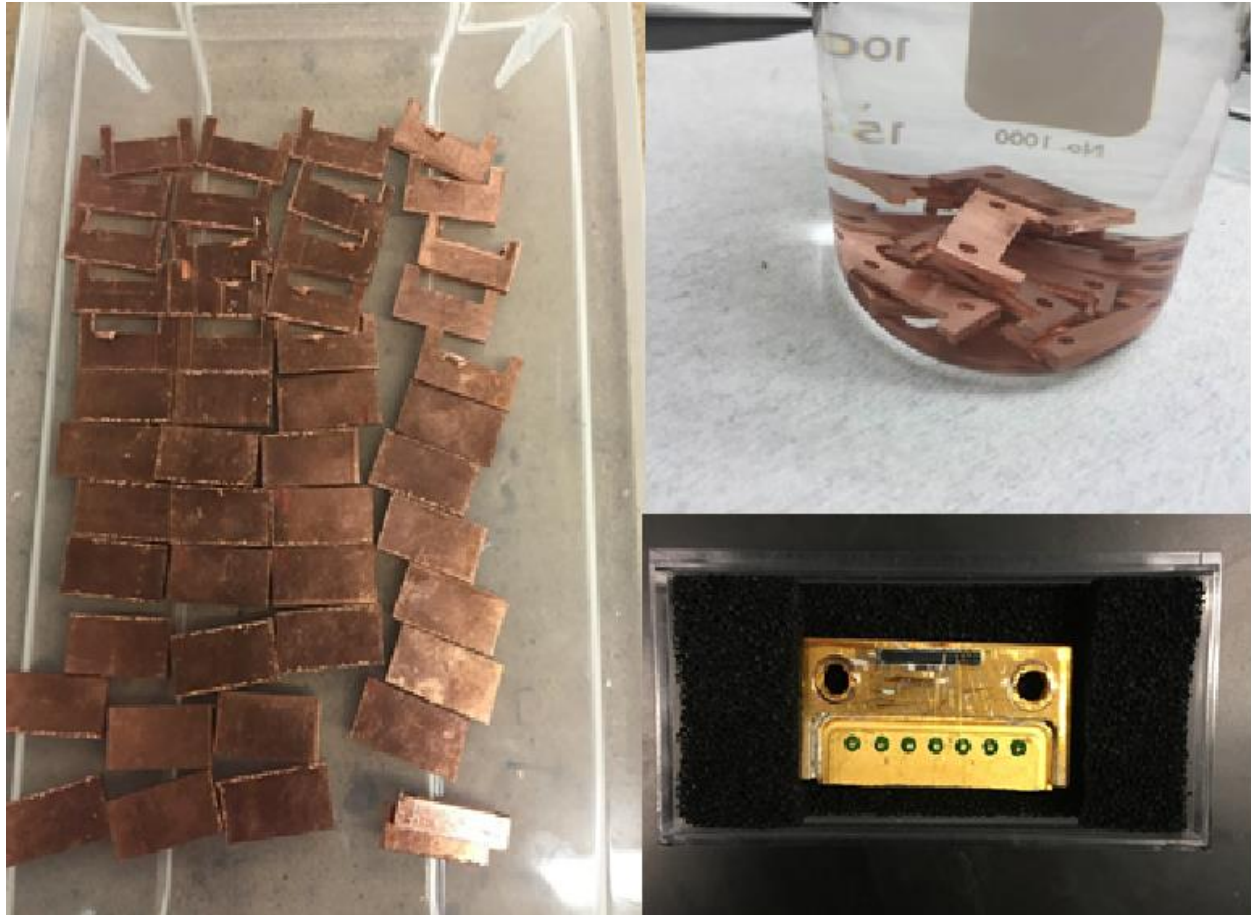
The thermal conductive sample holder. (From metal pieces to gold coated parts)
